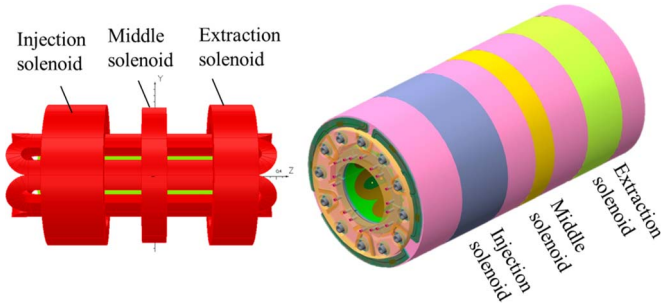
Left: Sextupole in solenoids configuration—Right: Magnet assembly.
